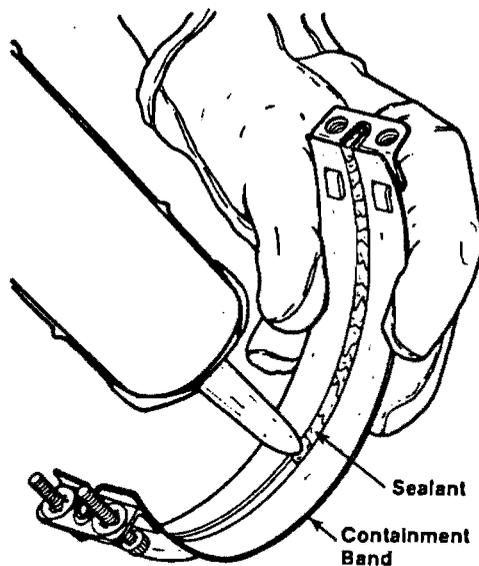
Basic Assembly Step 2: Fill deep V-groove of Containment Band with sealant.
